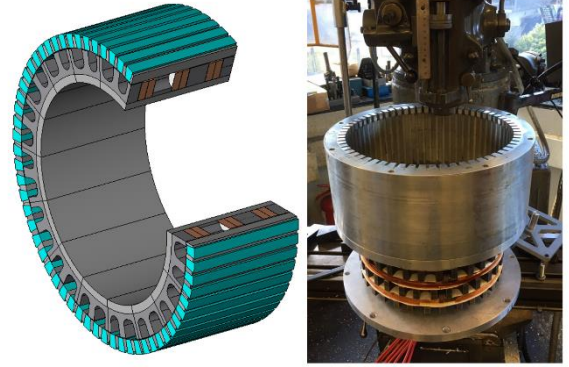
(l) Prototype 1 SMC-Laminate JMAG Model and (r) Constructed Prototype Rotor and Stator
